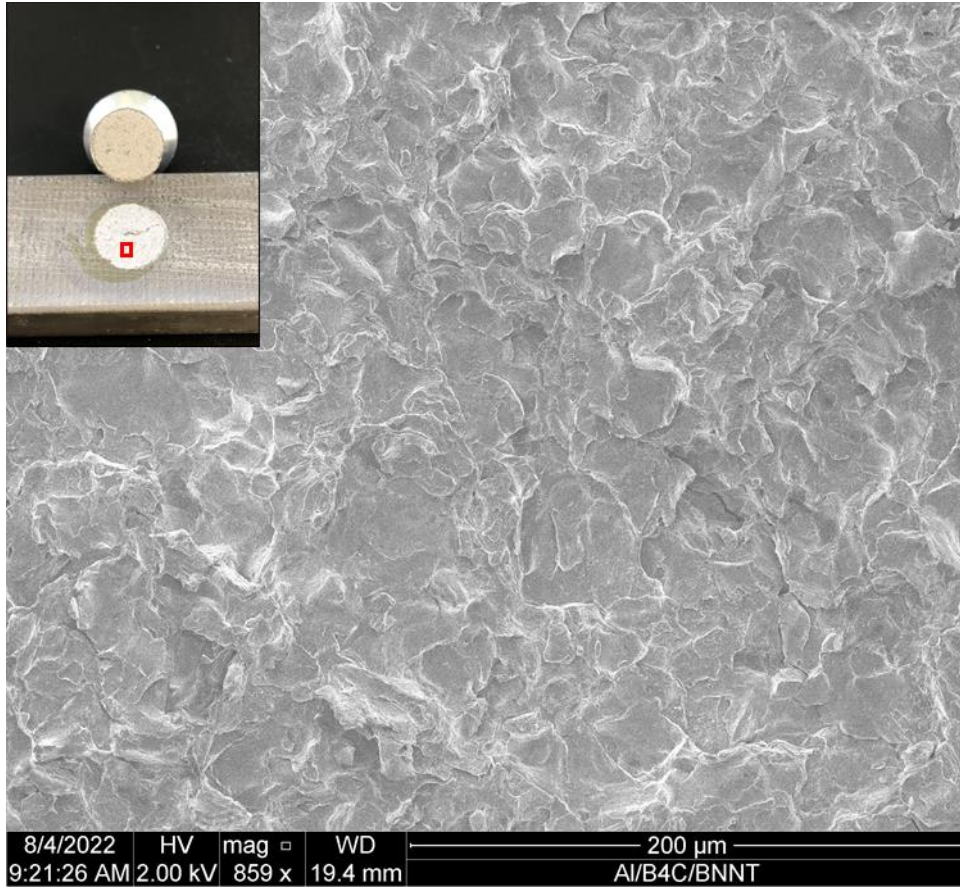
Al/B₄C/BNNT adhesion fracture surface
